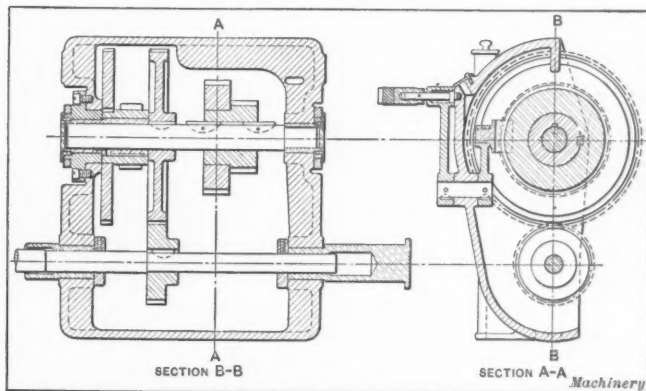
Cross-sectional View of Back-gear Box, showing Arrangement of Sliding Gears
